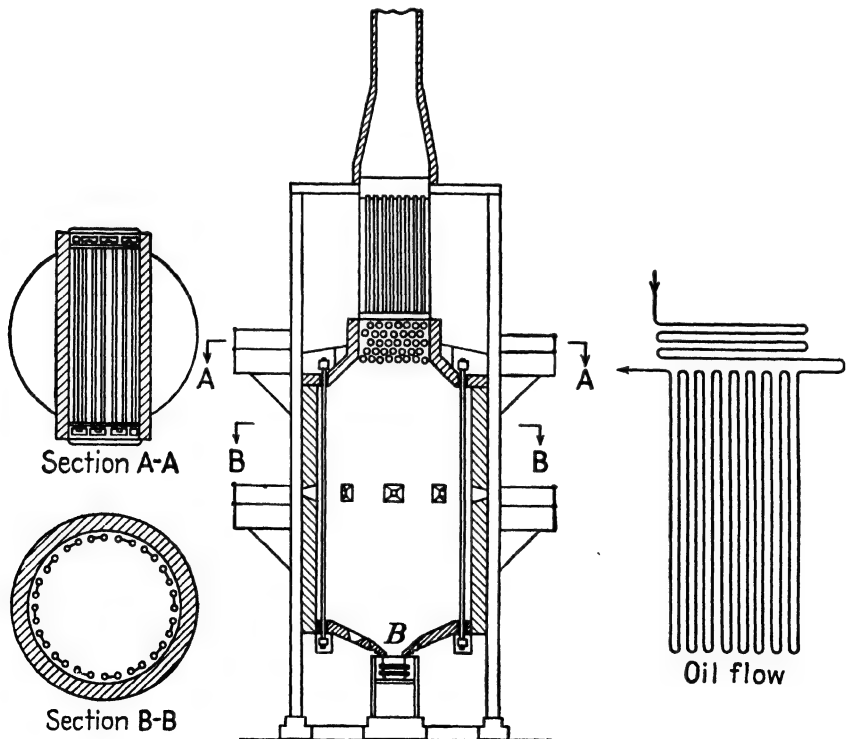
Cylindrical-type heater (updraft). (Courtesy of Universal Oil Products Company.)
